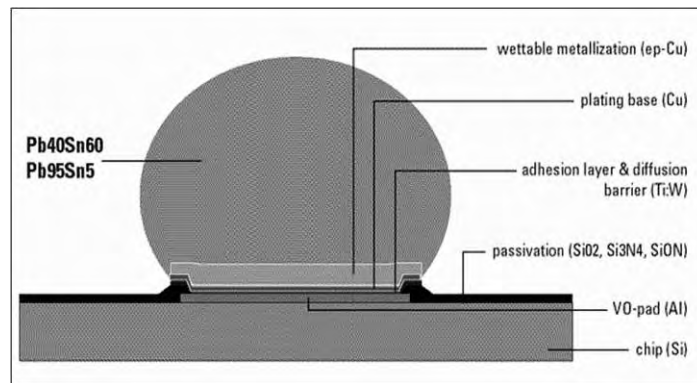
Build-up of a eutectic PbSn solder bump [44].
